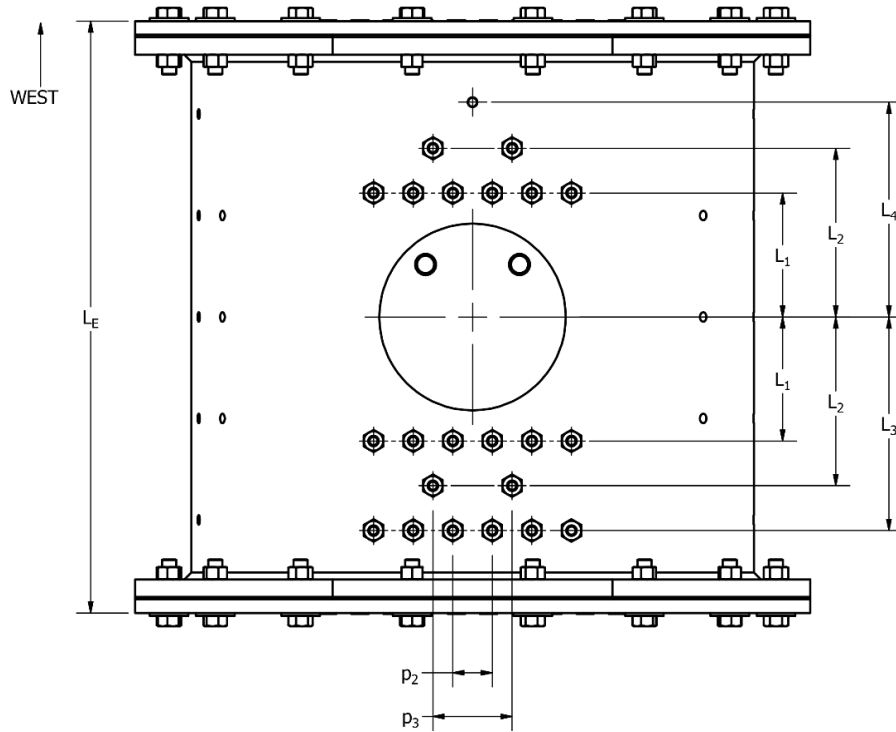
'Bruce A' test section, vessel top view (inlet position detail)
